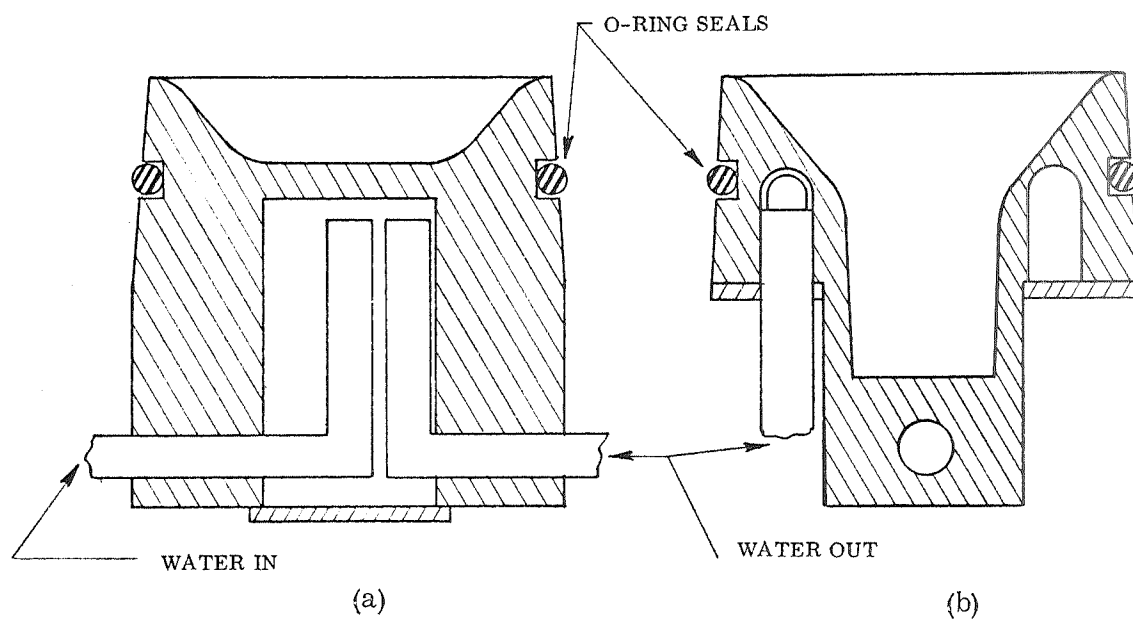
Consolidation Mold (a) and Drop-Casting Mold (b).
